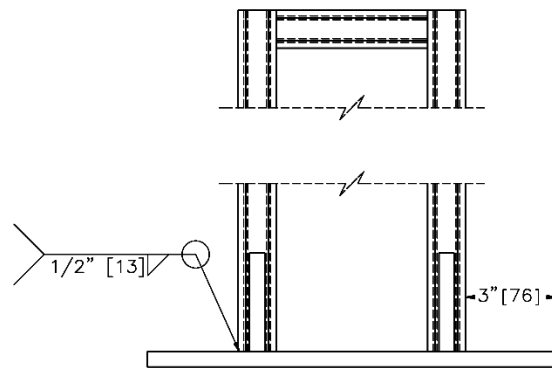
Cable Anchor Bracket Components, Test No. MTP-2
